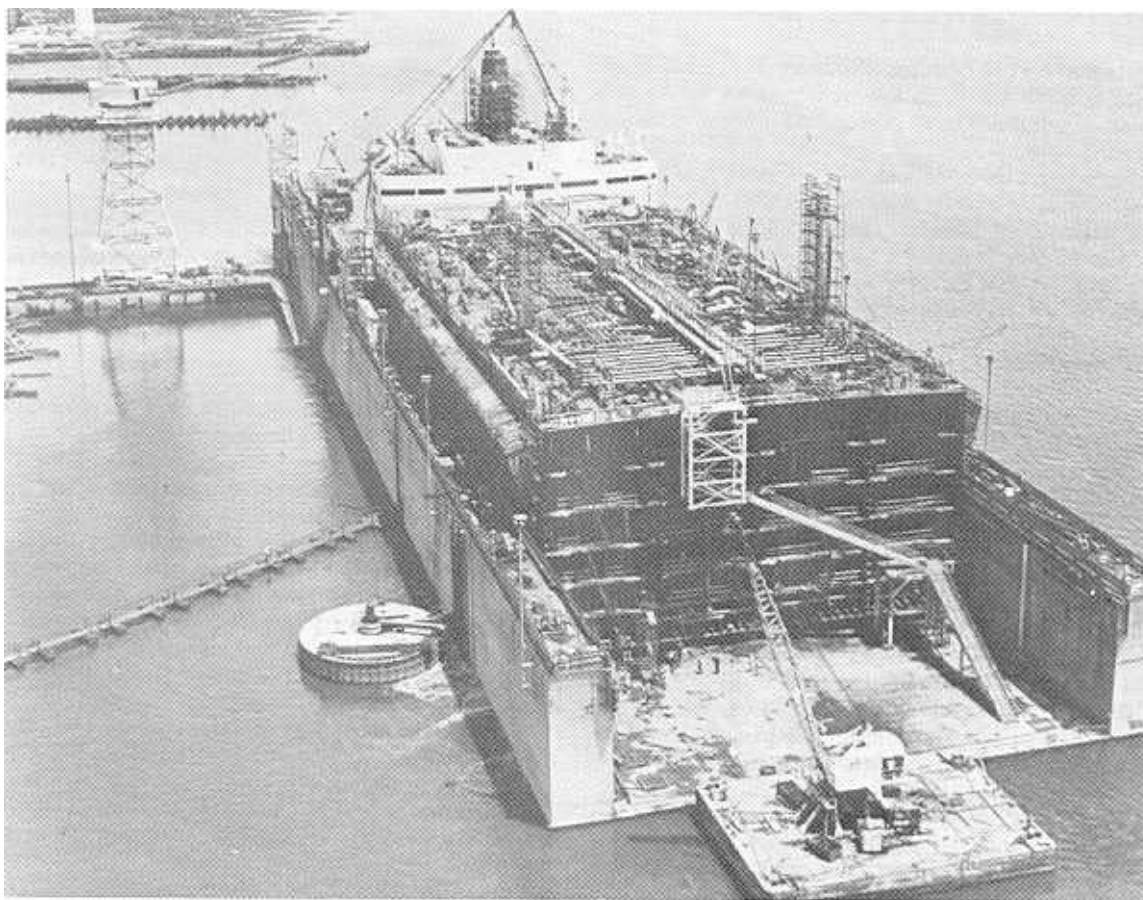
Manhattan* photographed on Sun floating dry dock before addition of new bow section
